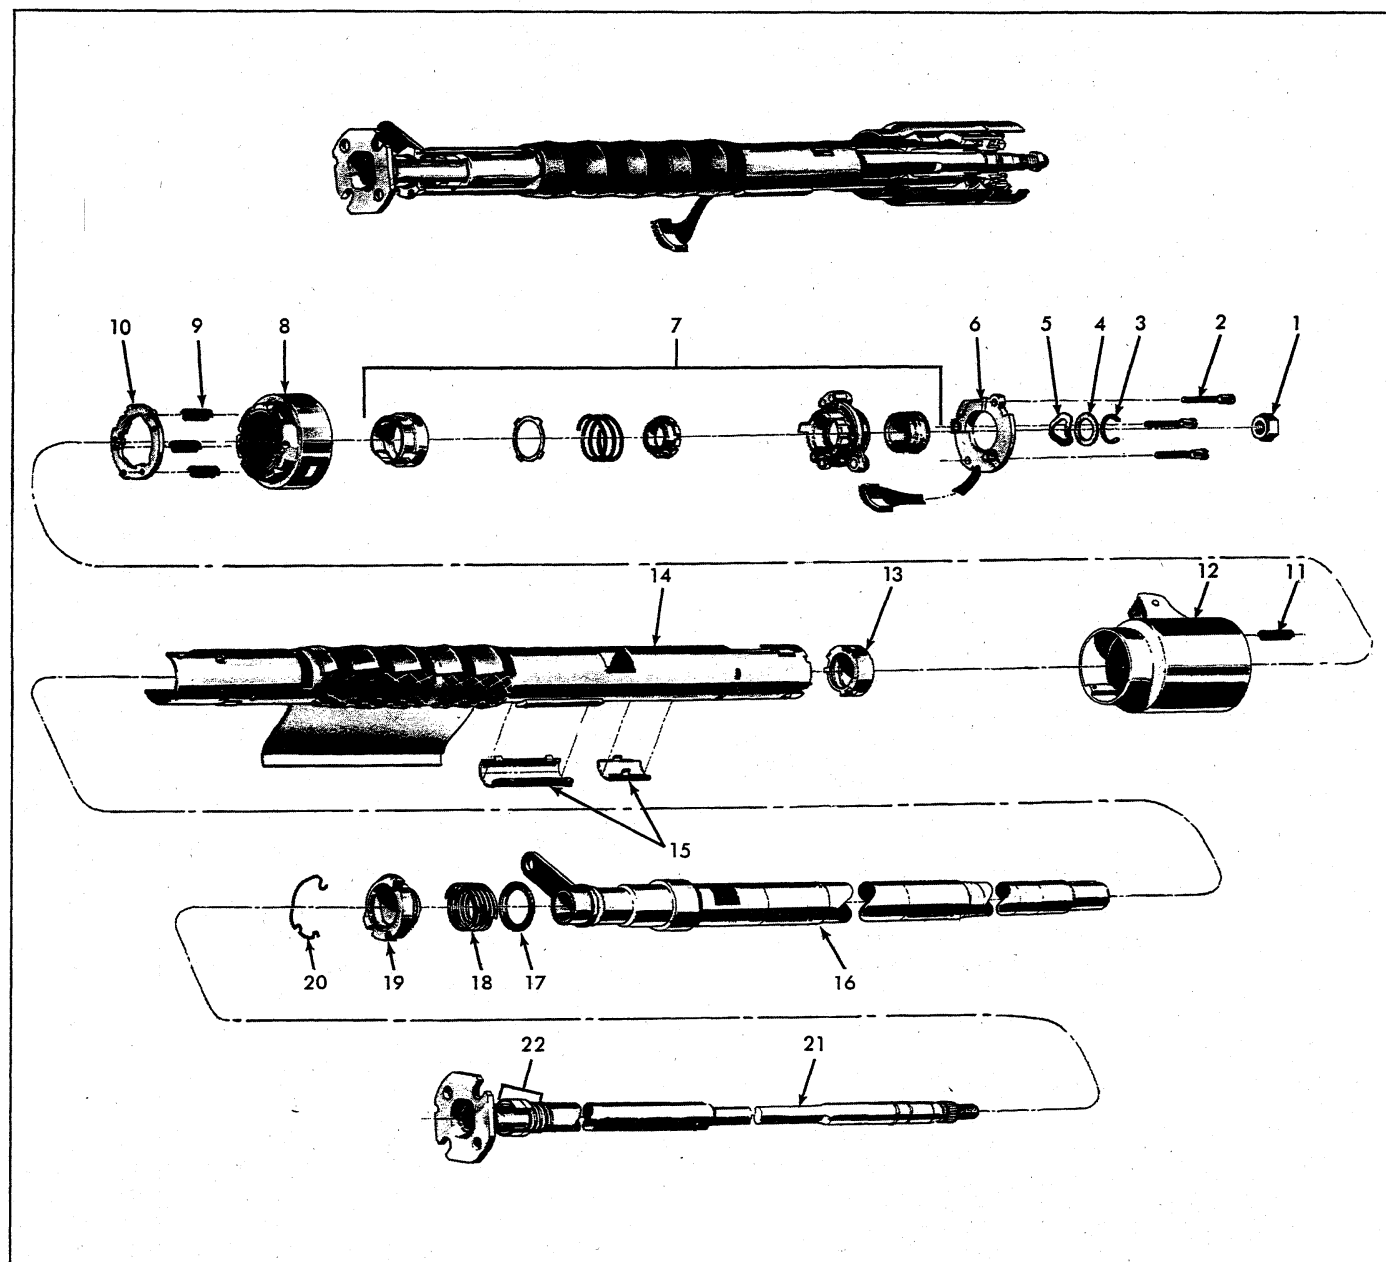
Column Mounted Powerglide Lever or Floor Shift Column—Exploded View
